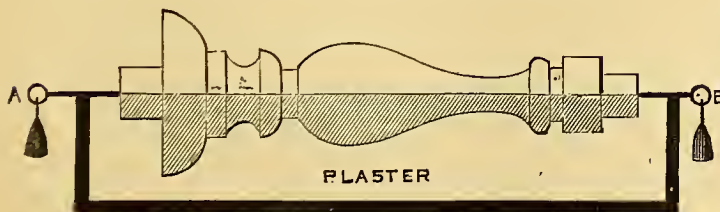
SIMPLE TURNED PILLAR—ELEVATION.
